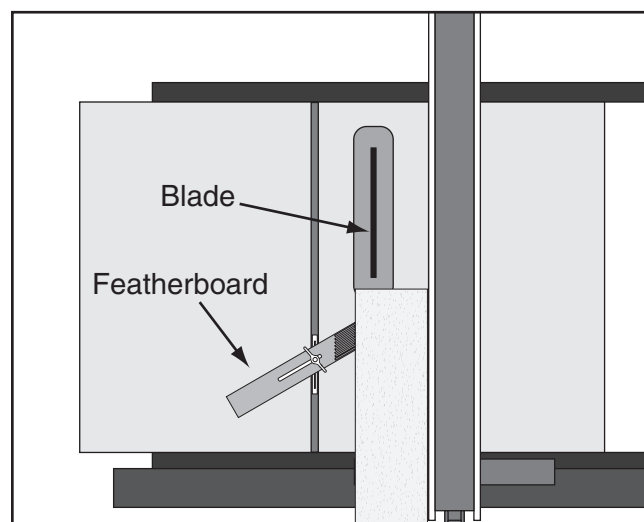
Featherboard installed in miter slot and supporting workpiece for ripping cut.
